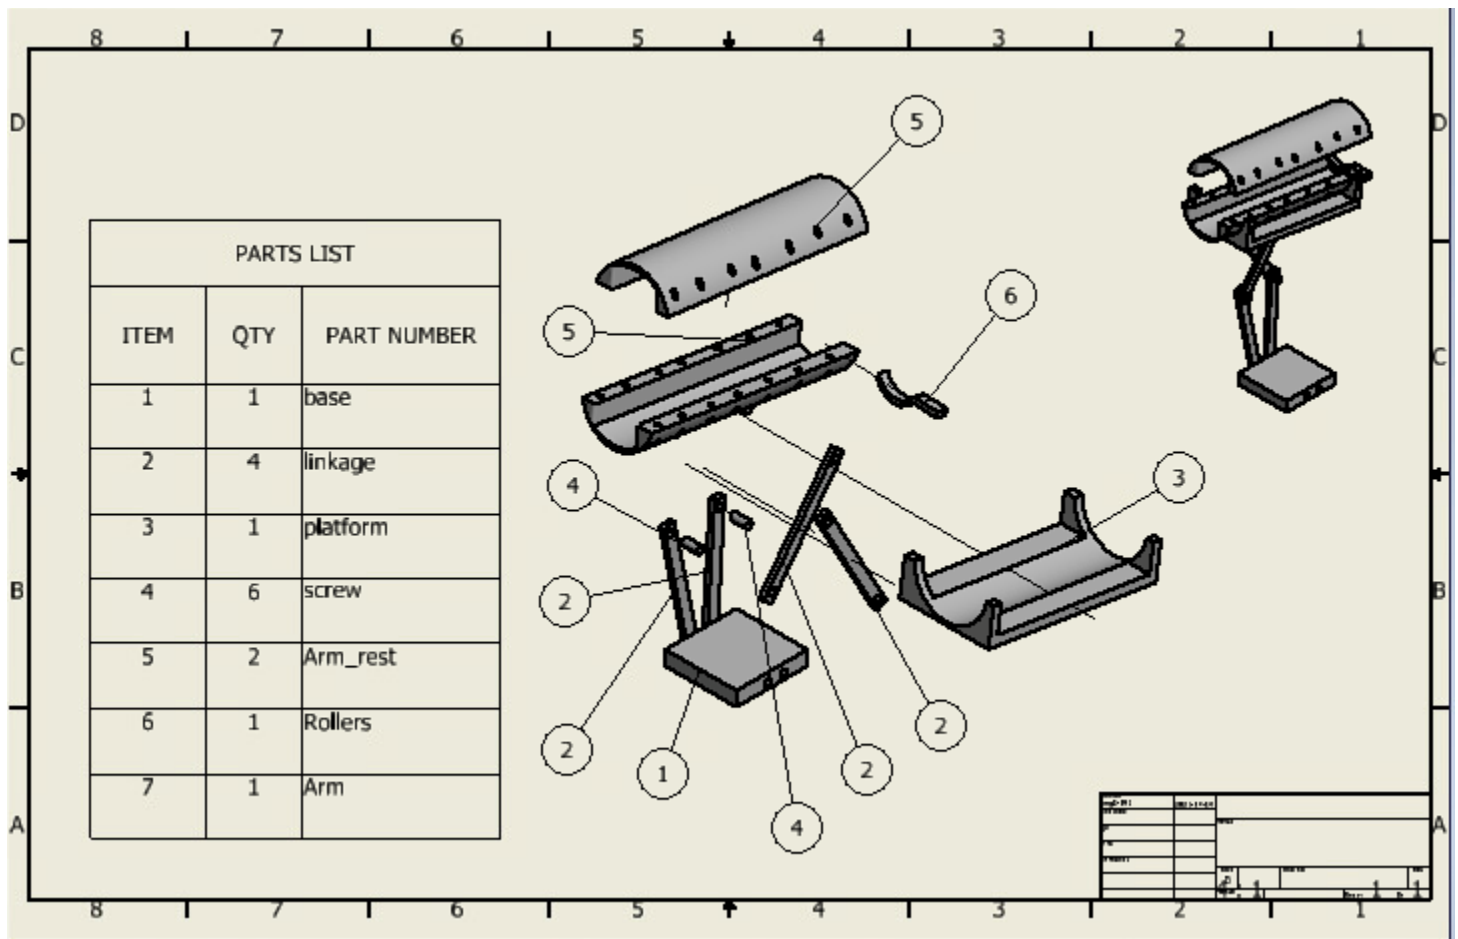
Exploded Assembly of our Final Proposed Design Solution
